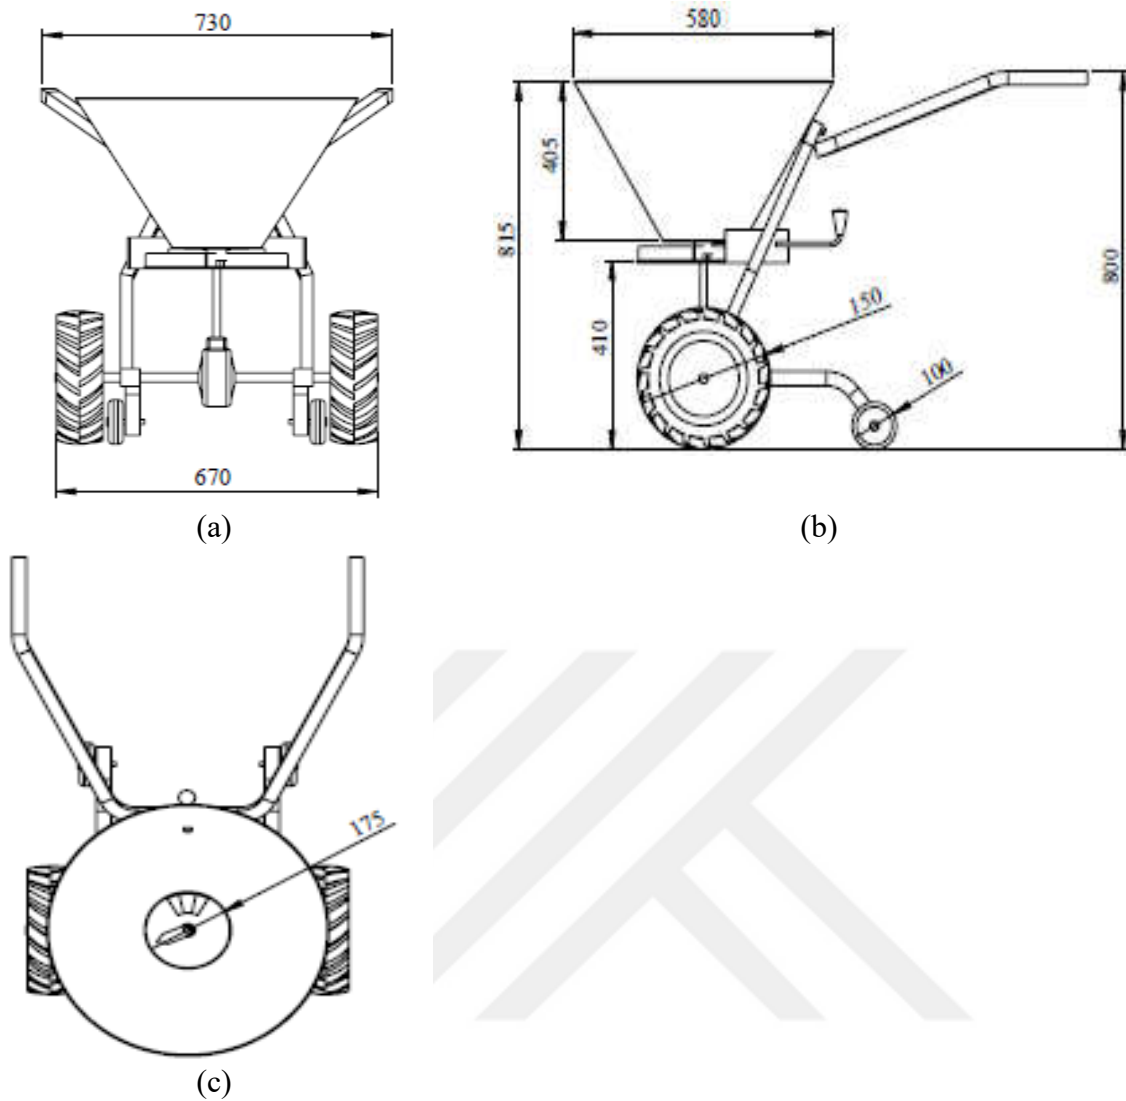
Technical drawing of the spreader with some dimensions. (a) Front side; (b) Left side and (c) Up side views
